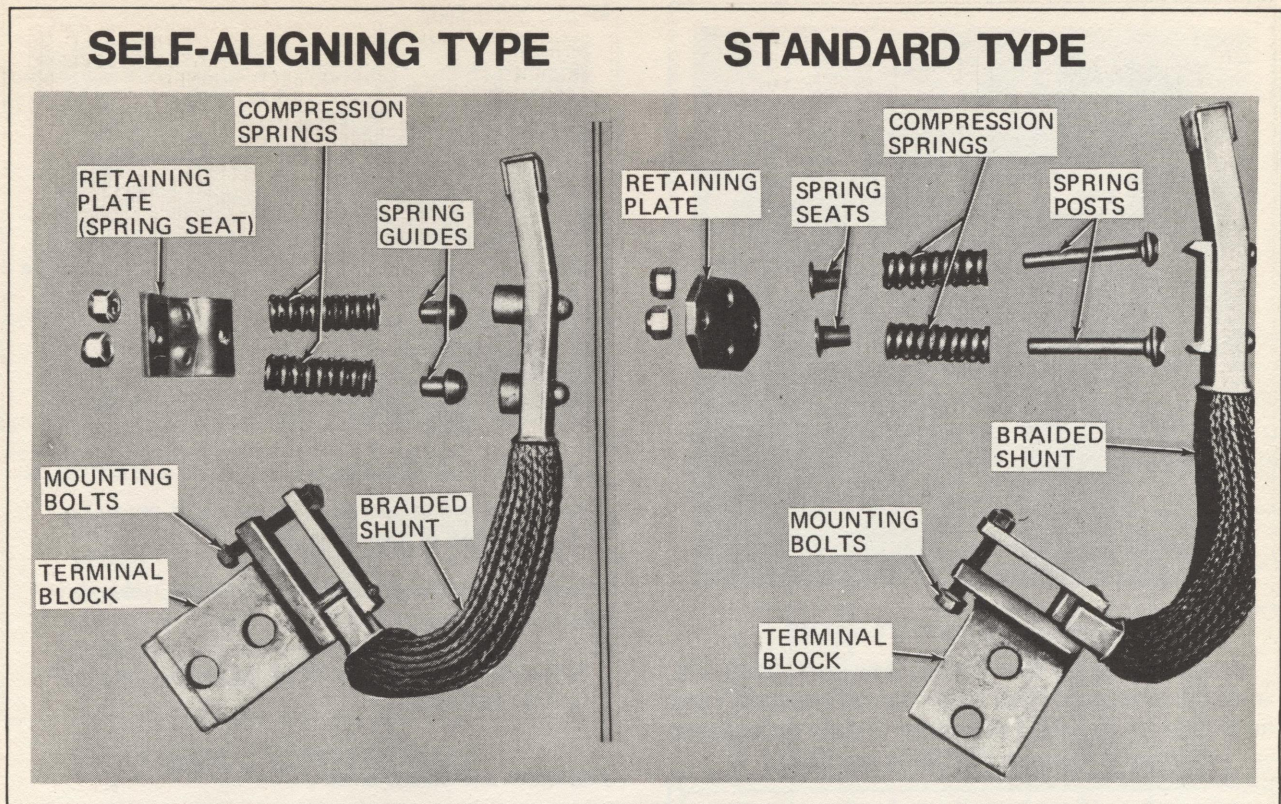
EXPLODED VIEWS OF STANDARD AND SELF-ALIGNING FINGER ASSEMBLIES.
